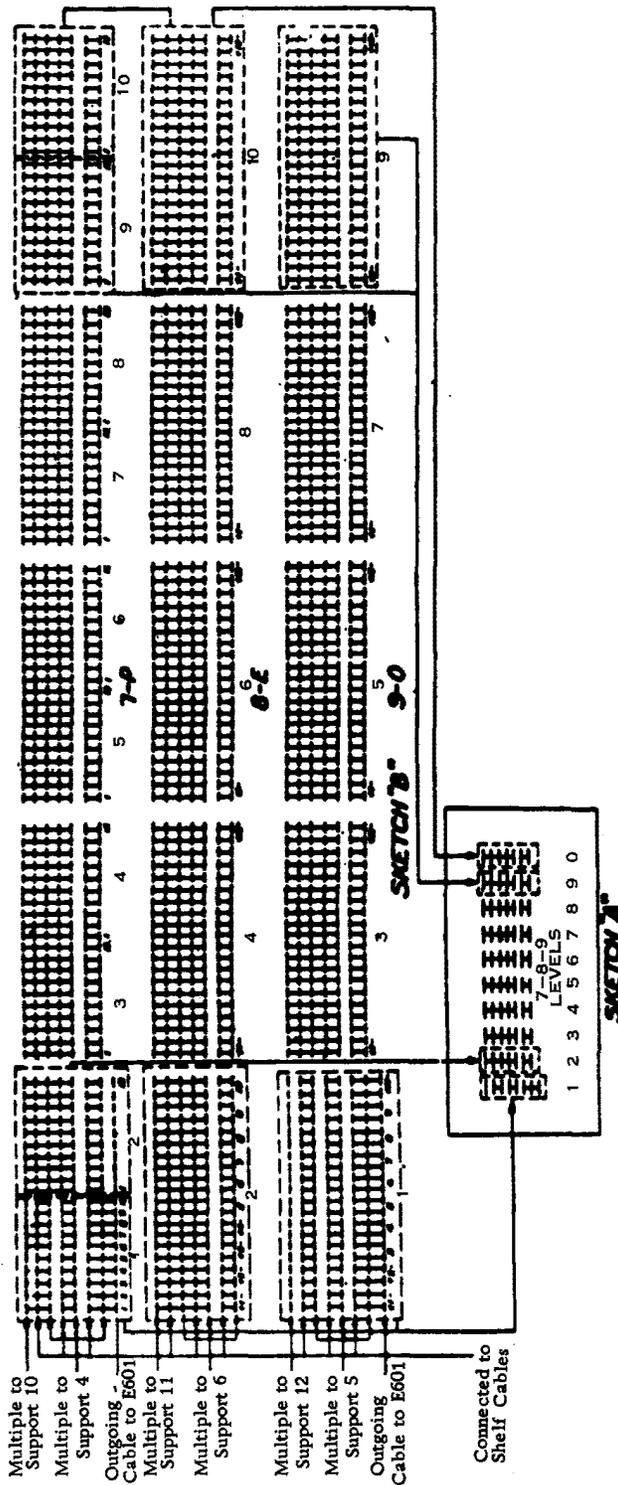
DETAIL VIEW OF SELECTOR TERMINAL ASSEMBLY
